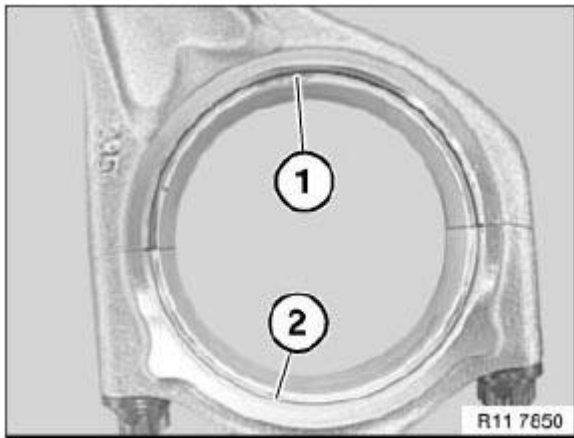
Identifying Blue And Red Bearing Shell Installation Position
